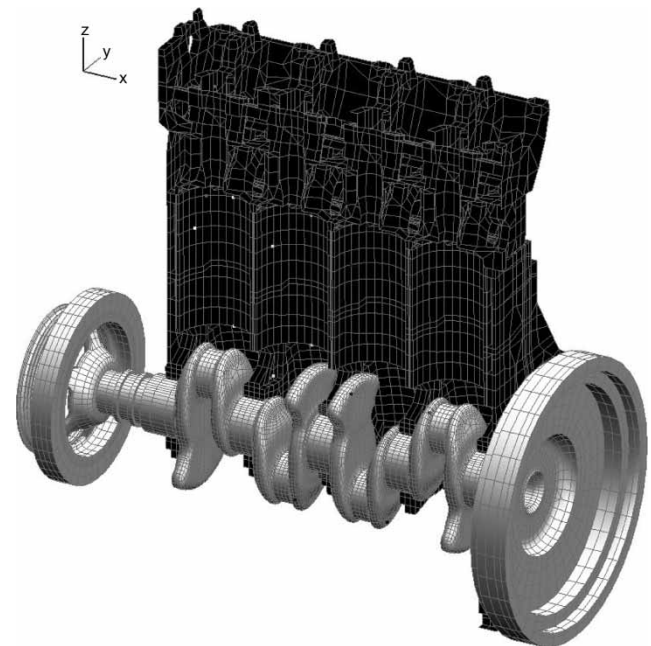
FEM-bodies of the power unit (cross-section) and the crankshaft
